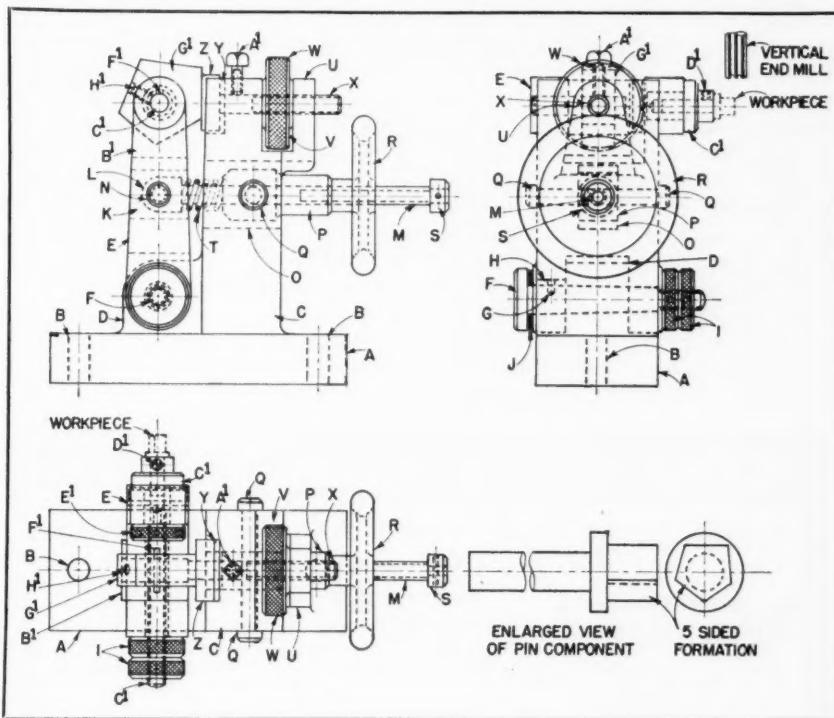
Drawing illustrating design of indexing fixture for milling irregular polygonal shapes, such as shown in lower right-hand corner.
